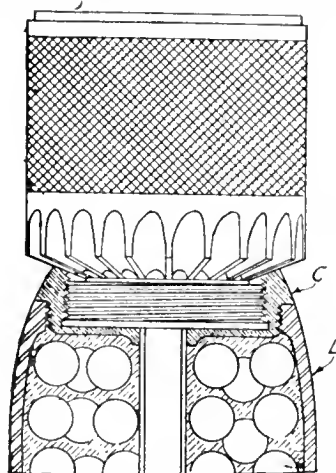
TOOL FOR BEVELLING BRASS SOCKETS.
